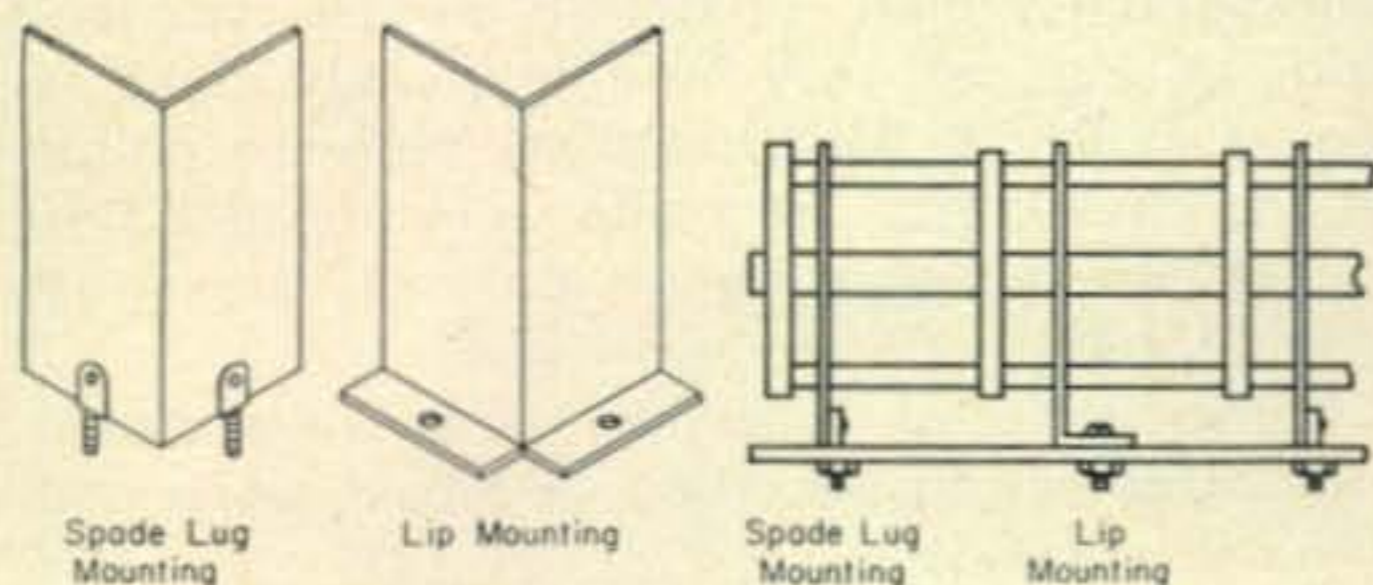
Spade lug mounting of shield requires less chassis space than a shield with a lip as shown. Spade lug and lip mounted shields are shown between sections of a bandswitch. Note that there is more mounting space for other components in the left hand section than in the right one where the lip of the center shield takes up usable space.
